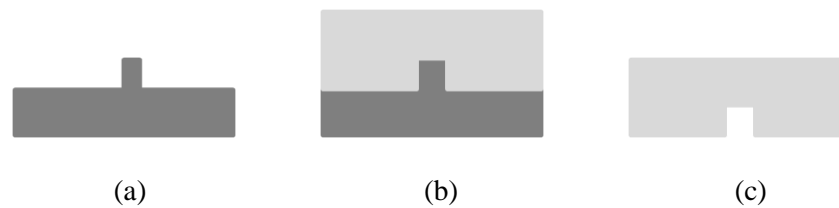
, (a) cross section of the mold for PDMS upper cladding (b) molding PDMS against the mold (c) cross section of molded PDMS upper cladding with a channel printed in it
